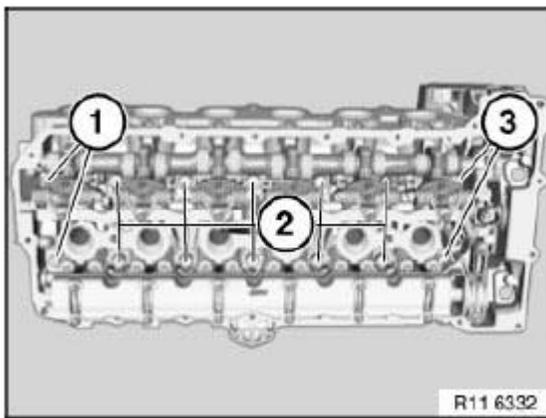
Releasing Cylinder Head Bolts Using Special Tools
